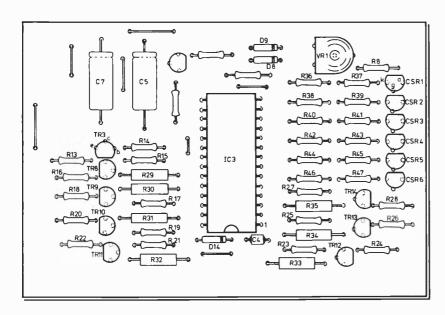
Clock circuit board PCB2 component layout. (Alarm circuit components are not annotated —details next month.)
